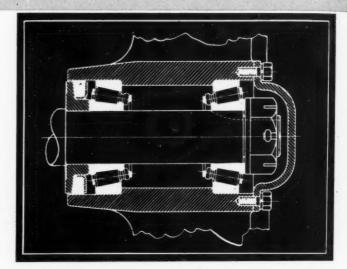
Held in position by still another type of metal retainer, felt is used to protect roller bearings
